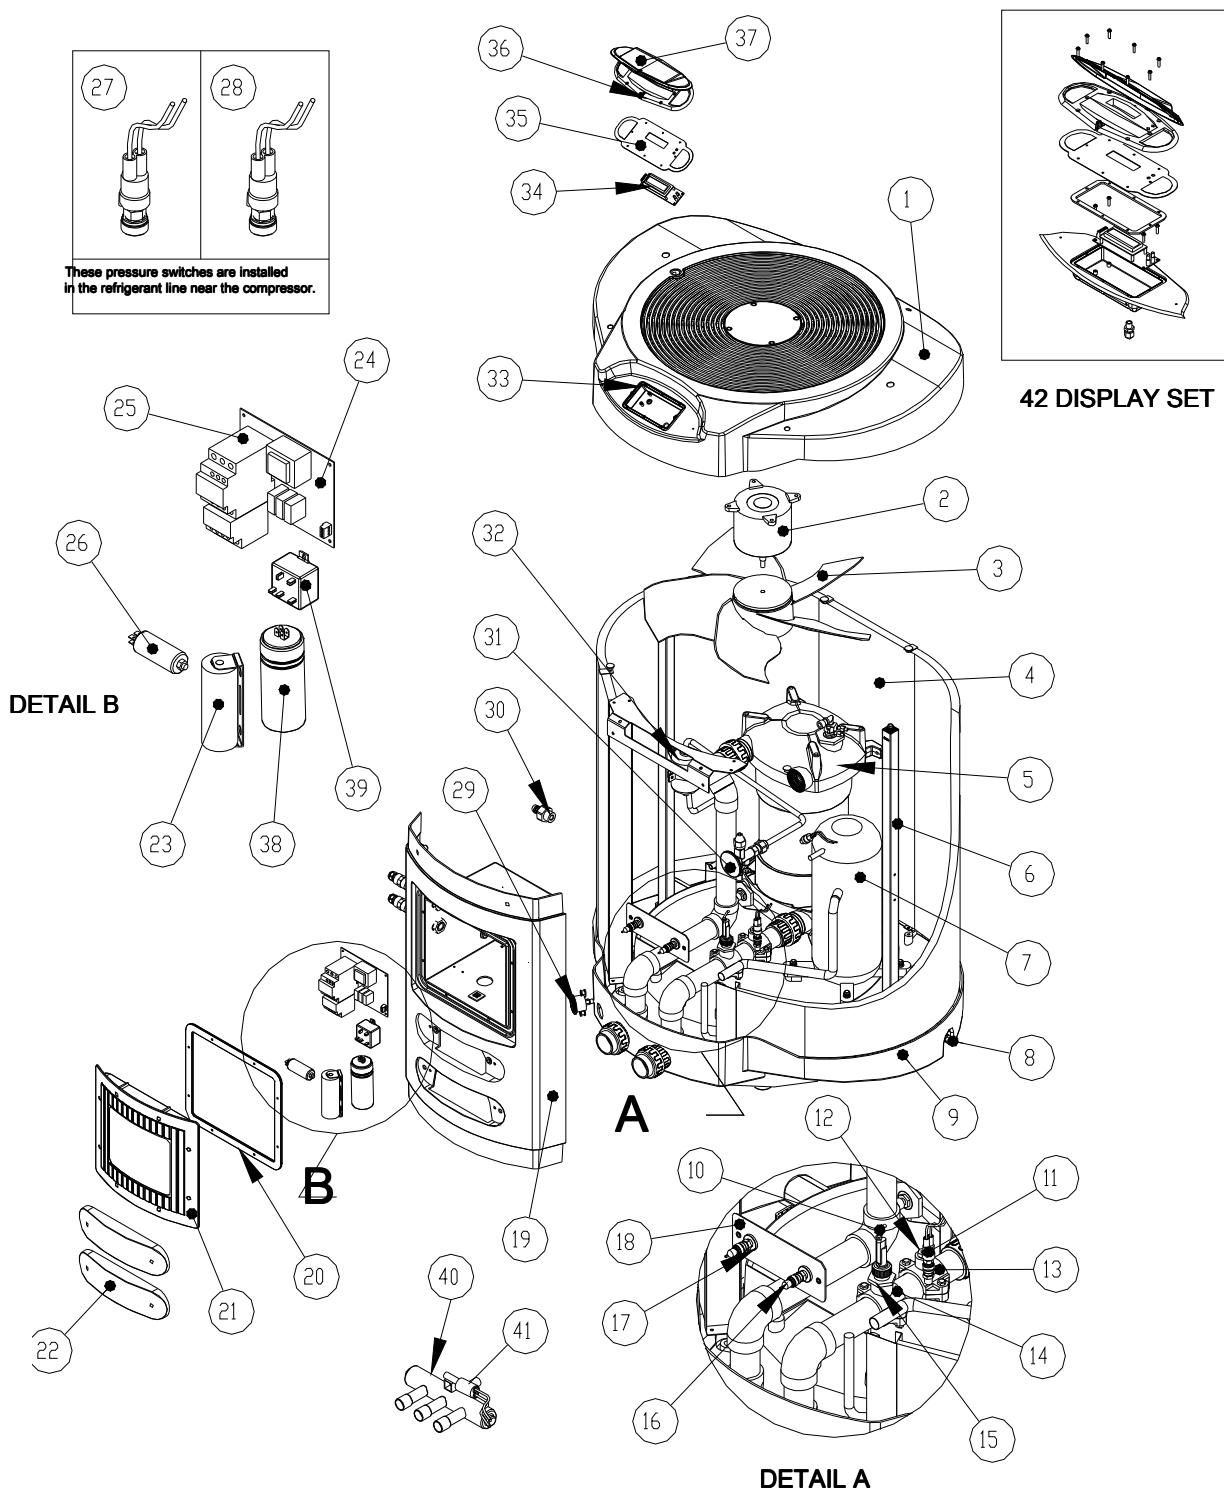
AstralpoolHeat Heat Pump Exploded View.
